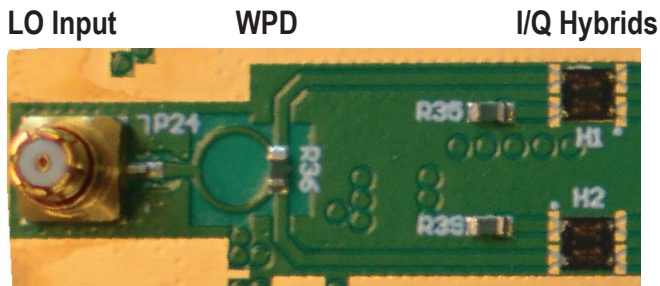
A zoom-in on the PCB showing the WPD and discrete hybrids (Marki MQS-0418) for splitting the LO input.
